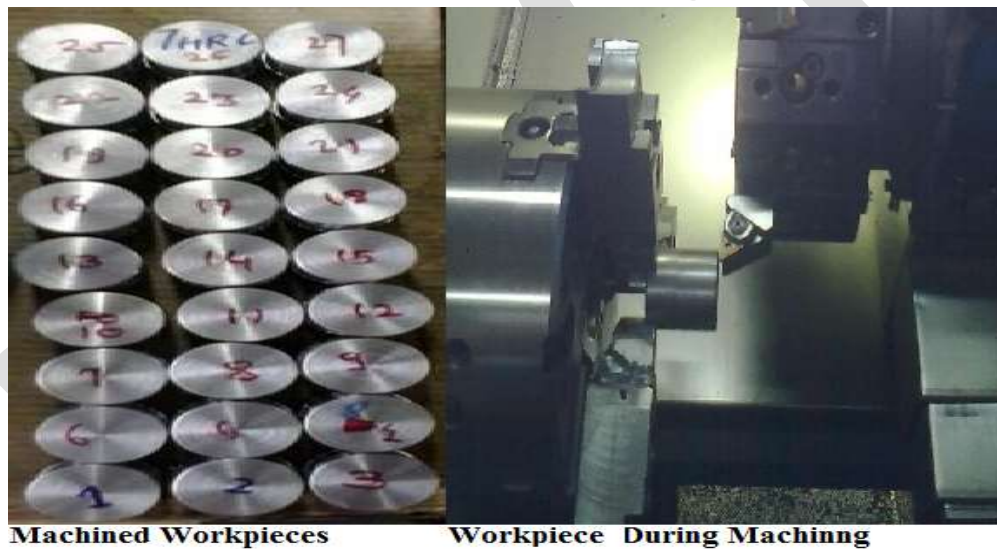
Machined Workpieces and Workpiece with cutting tool during machining
